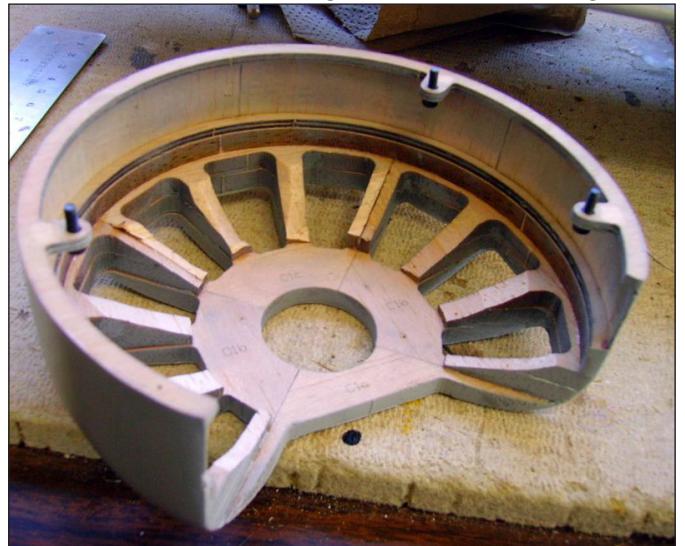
Small 1/8" pegs to help locate the front end assembly.
